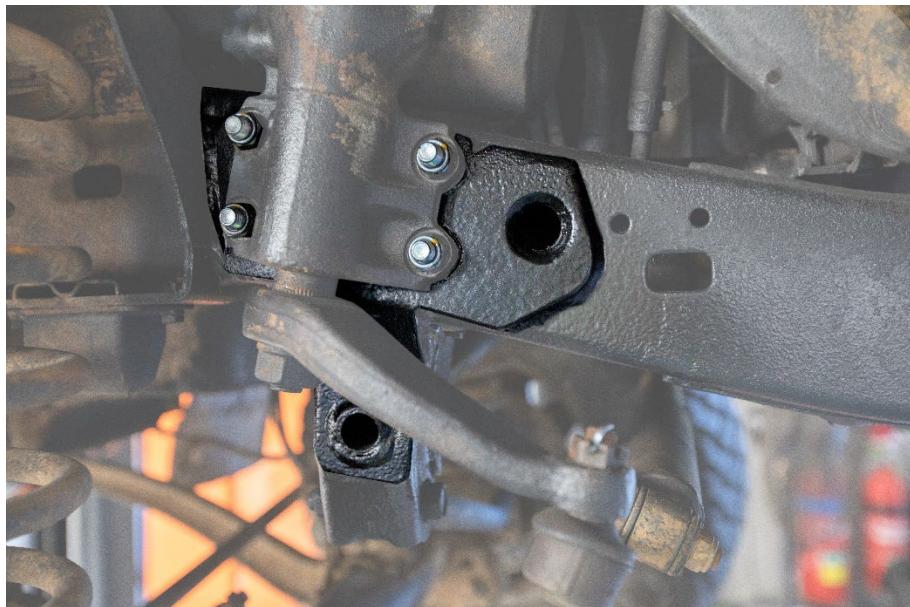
& 13: Final Fitment of plates welded and painted.
